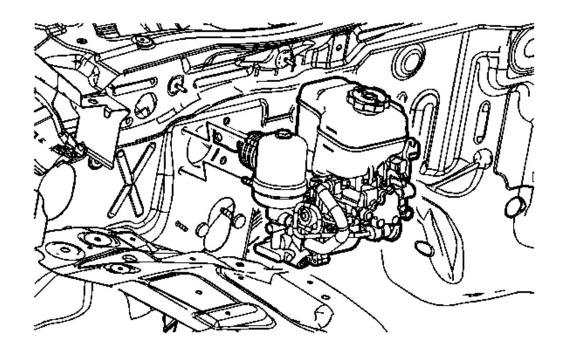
Removing/Installing Master Cylinder/Power Brake Booster Assembly Courtesy of GENERAL MOTORS CORP.
